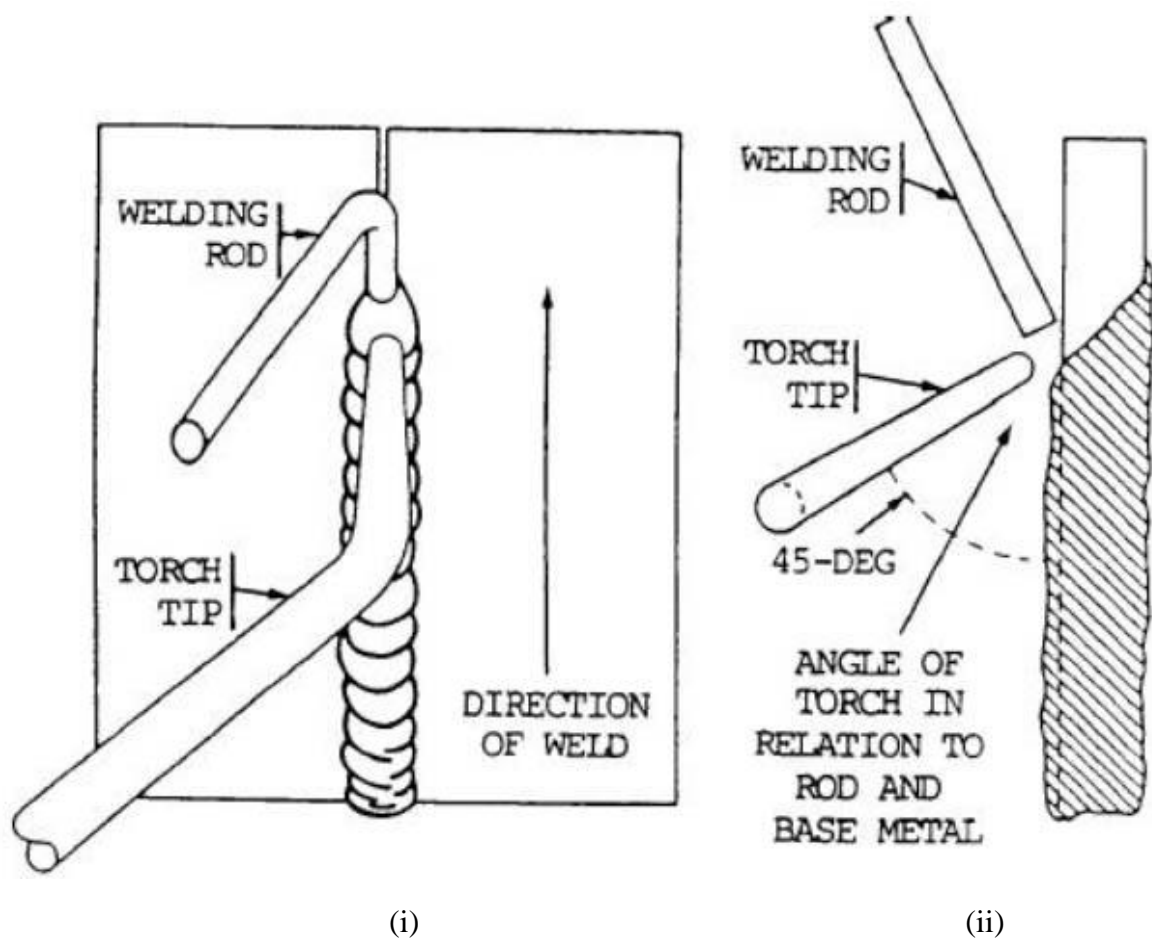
(i) - Front view, (ii) – side view vertical position butt weld [20]
